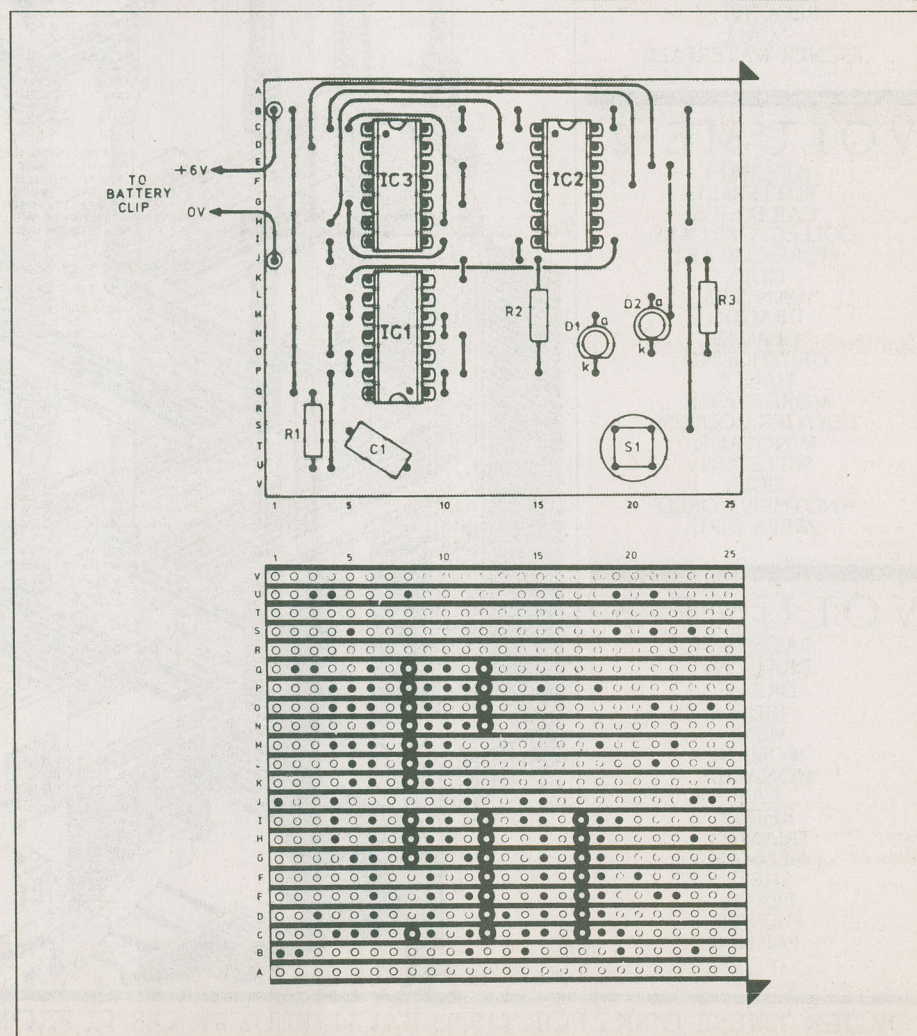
Stripboard component layout for the Heads or Tails circuit.
